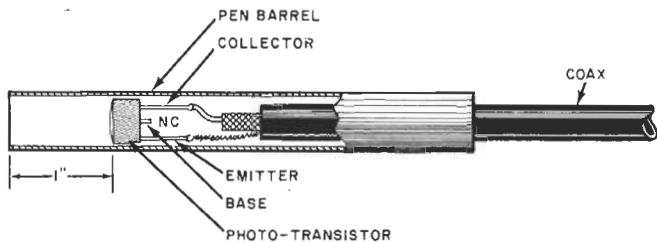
To make probe, phototransistor is mounted in an old pen barrel and connected to a coaxial cable.
